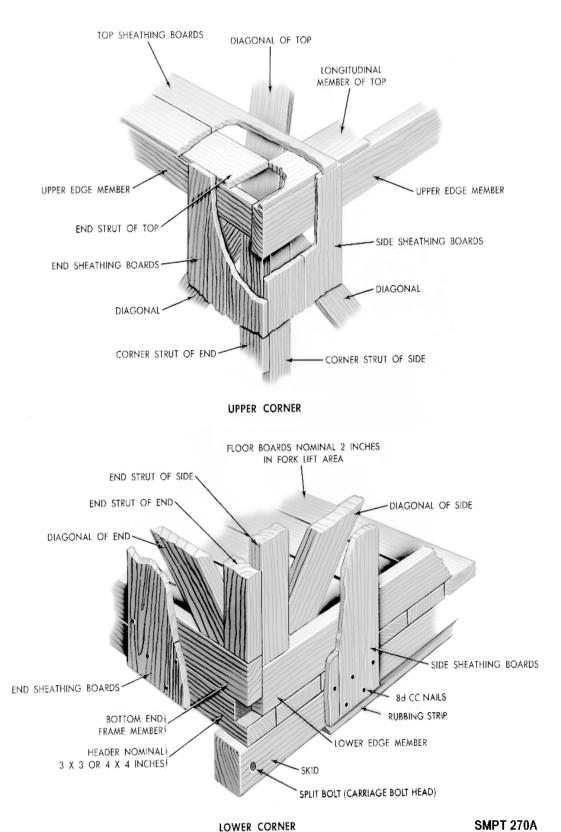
Assembly details for nailed crates (MIL-C-3774).
